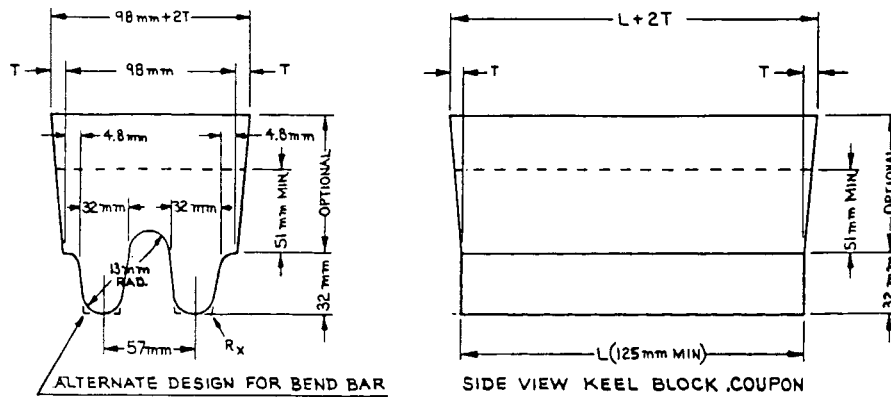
A Test Coupons for Castings (mm) (see Table 1 for Details of Design)
